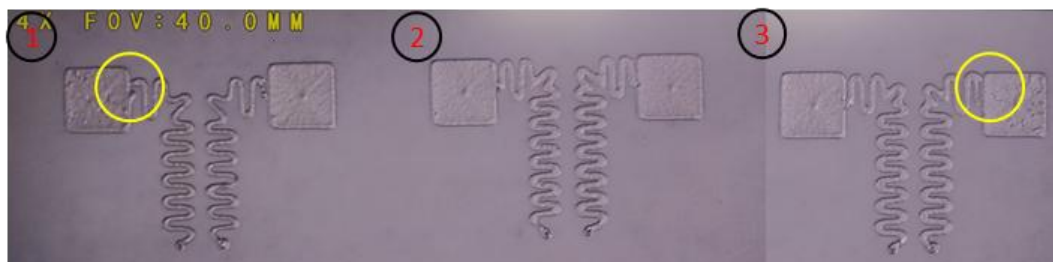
Printed EMG Patch with Extended Track Width on Tattoo Sheet
